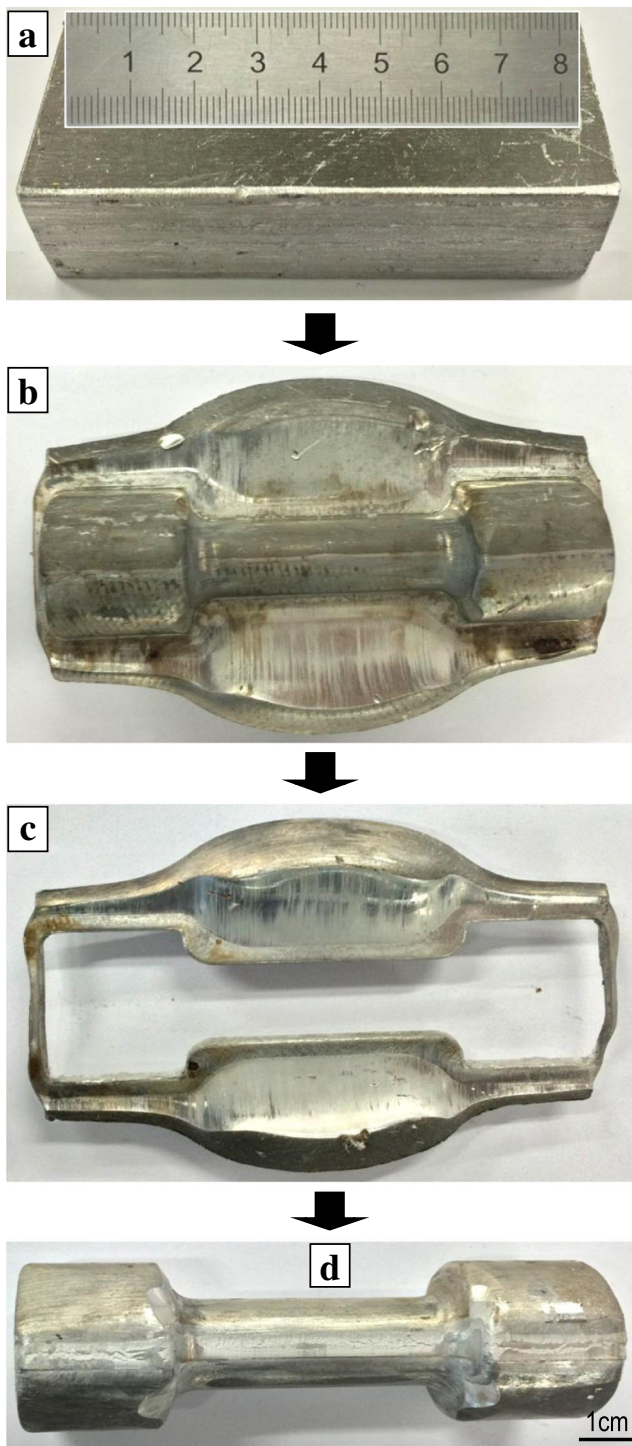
Forging sequence employed in the present work for the experimental part. a Preform cut from TBC EN AW 6082 blank with the following dimensions: 30 × 30 × 80 cm. b Experimental part forged from the TBC blank. c Flash and d forging produced
